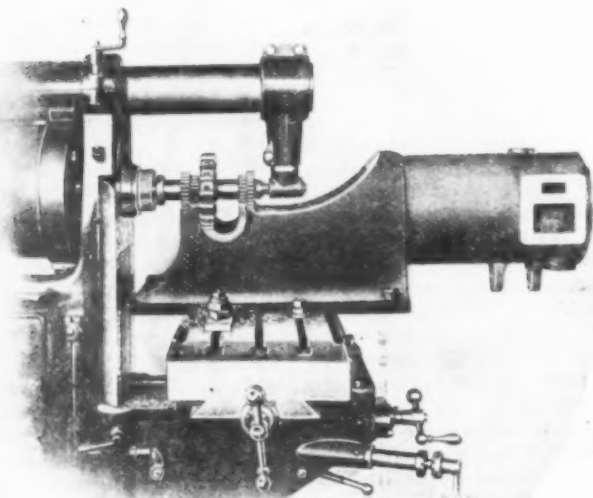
MILLING ENGINE FRAMES ON CINCINNATI MILLER. [See "Notes From Northern Machine Shops."]
